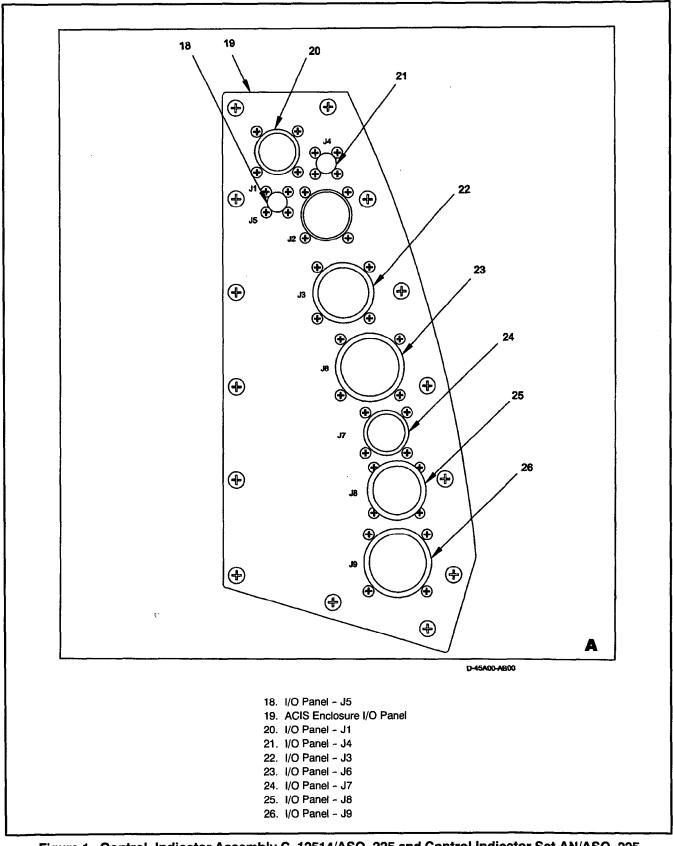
Control-Indicator Assembly C-12514/ASQ-225 and Control Indicator Set AN/ASQ-225 Components (Sheet 4)
